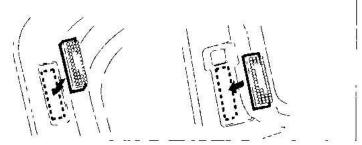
Attaching Upper Corner Fasteners With Adhesive Tape A Courtesy of AMERICAN HONDA MOTOR CO., INC.
